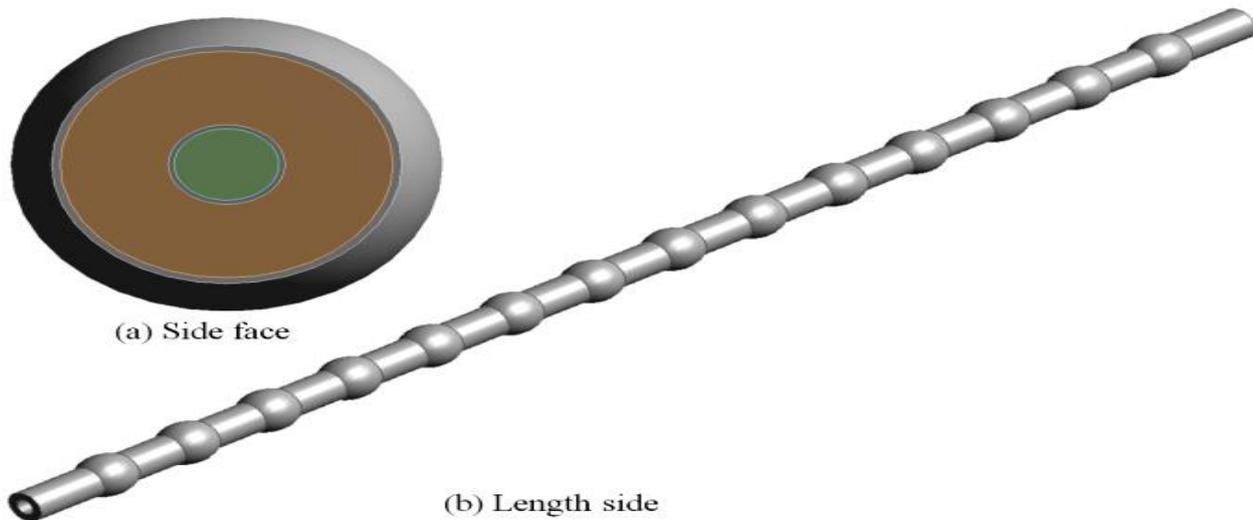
CAD model of double tube heat exchanger with spherical element; (a) Face side (b) length side
